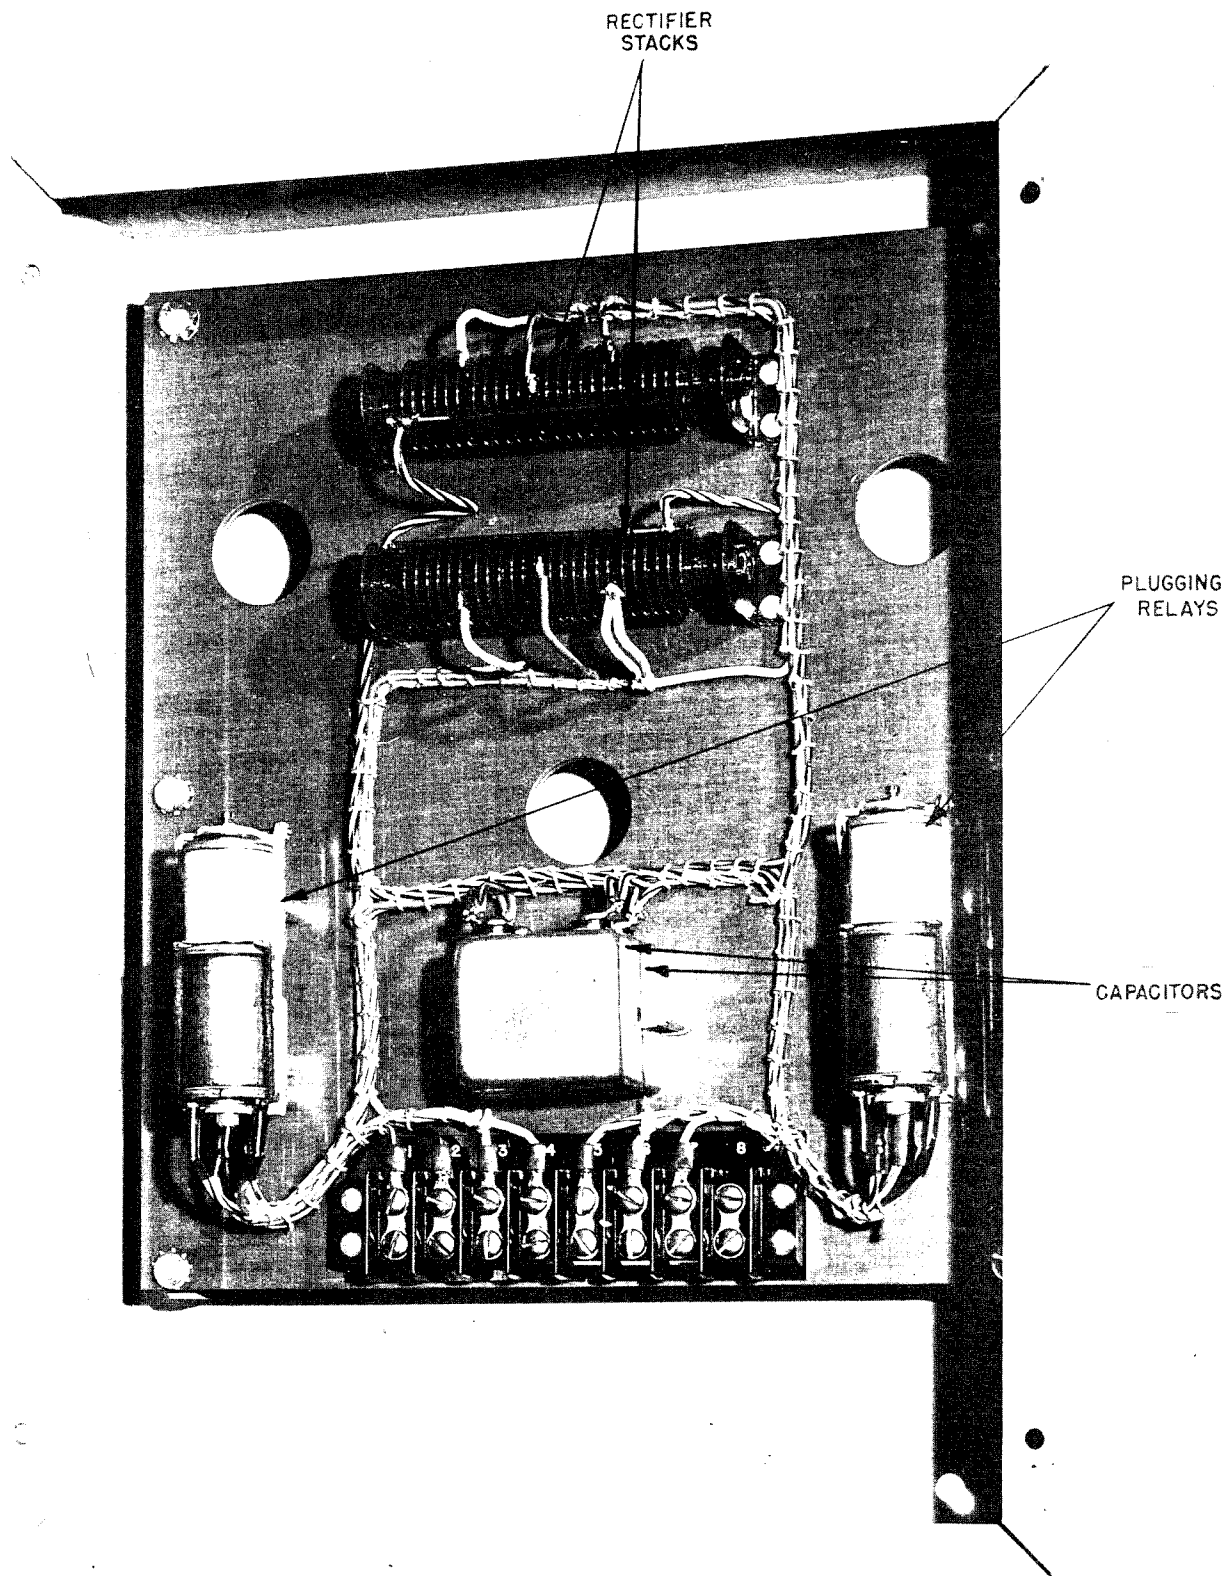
PLUGGING RELAY ASSEMBLY
